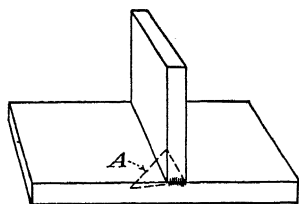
Flat fillet weld, horizontal position. Dotted lines indicate weld.
